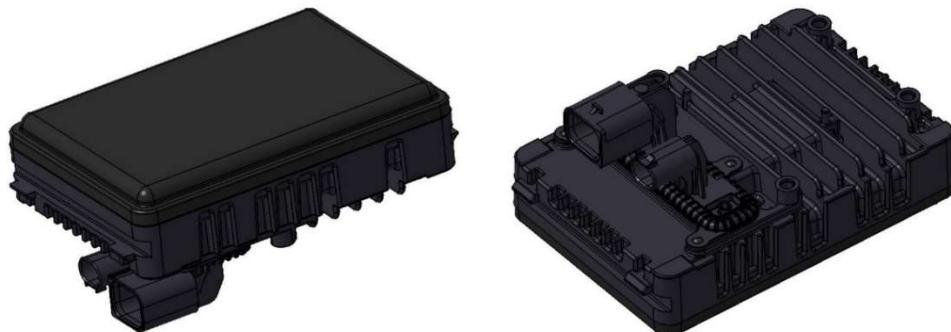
Dimension Drawings – Mechanic Configuration ARS 548 RDI
